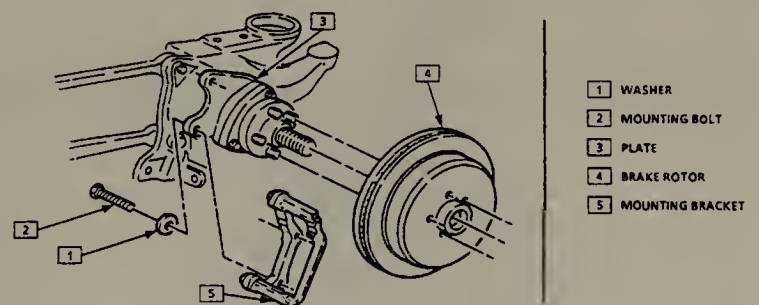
Exploded view of the rear caliper mounting bracket—1996 vehicle shown
